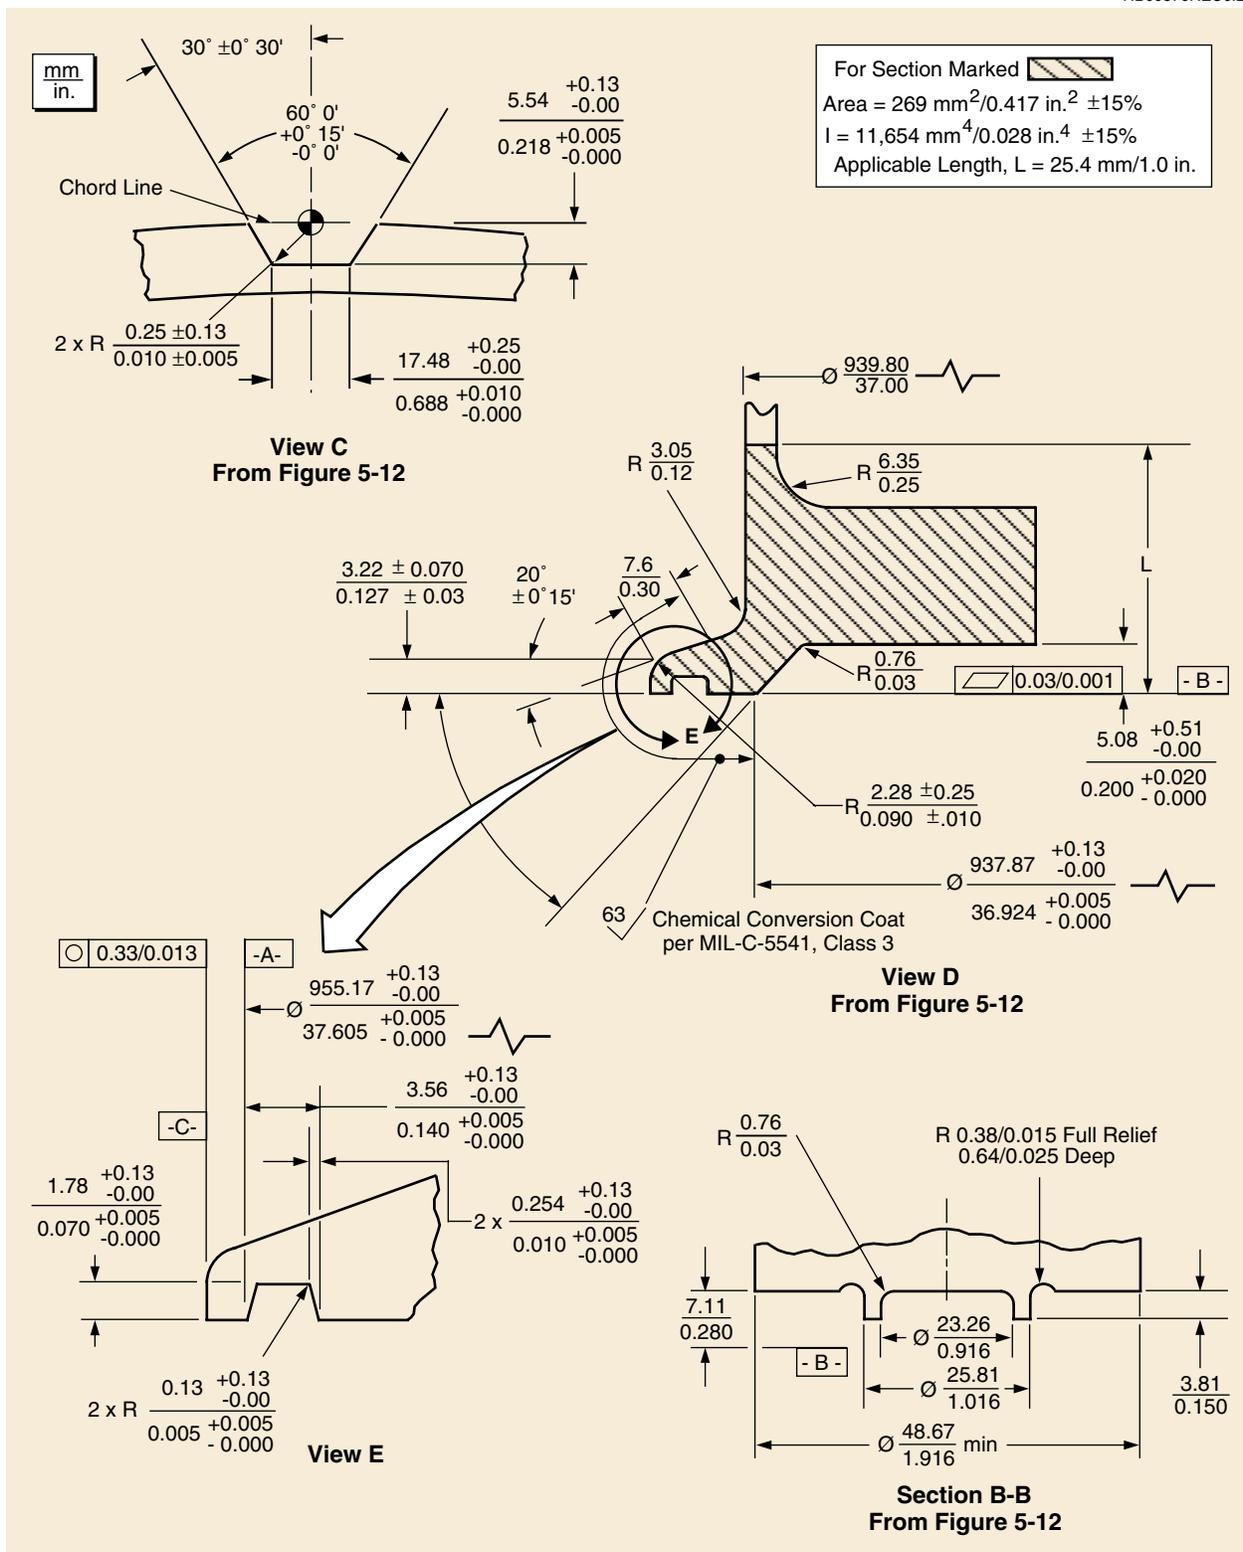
Dimensional Constraints on Spacecraft Interface to 3712B PAF (Views C, D, and E and Section B-B)
